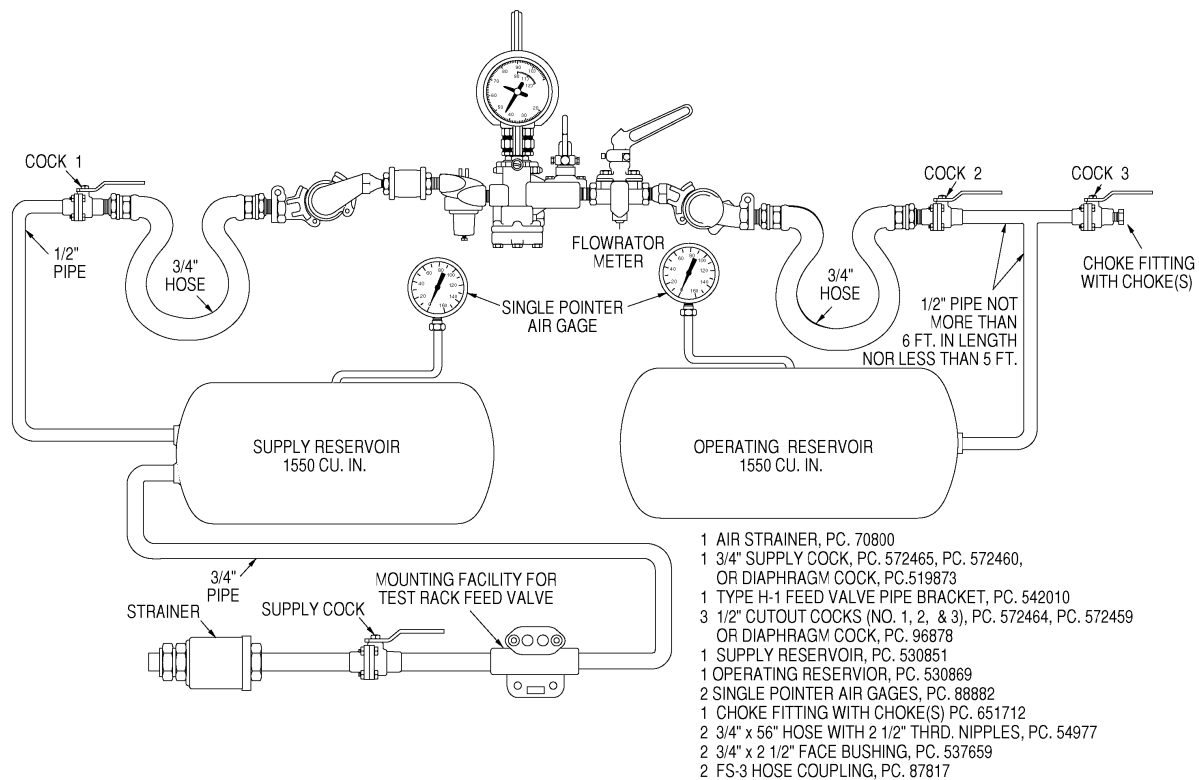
Standard Rack for Testing the Passenger Single Car Testing Device
